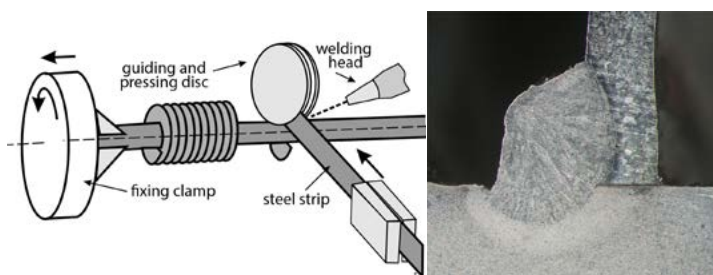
MAG welding of ribbed pipes: a) scheme of welding utilising a fillet weld, b) ribbed pipe with a smooth rib made using MAG welding with a fillet weld [11]
